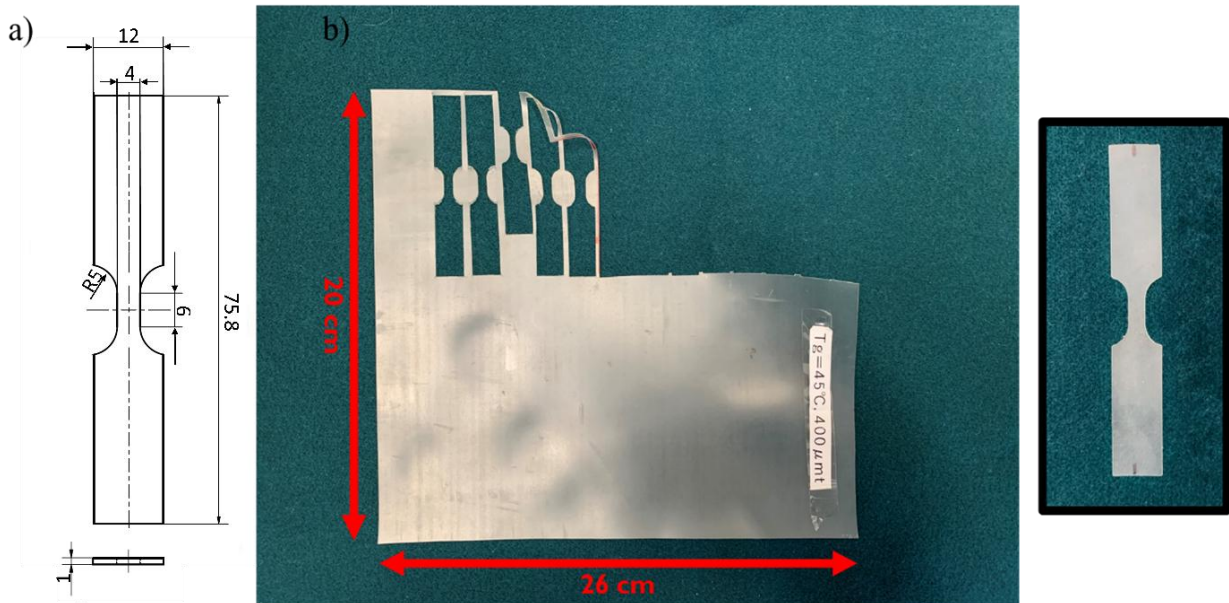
a) Technical drawing of the dog-bone PU-SMP specimen used for mechanical and thermomechanical investigations; b) Image of the PU-SMP sheet along with the dog-bone specimens that were cut from it.
